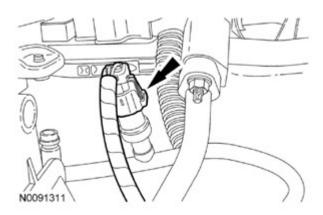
Locating Radiator Courtesy of FORD MOTOR CO.
